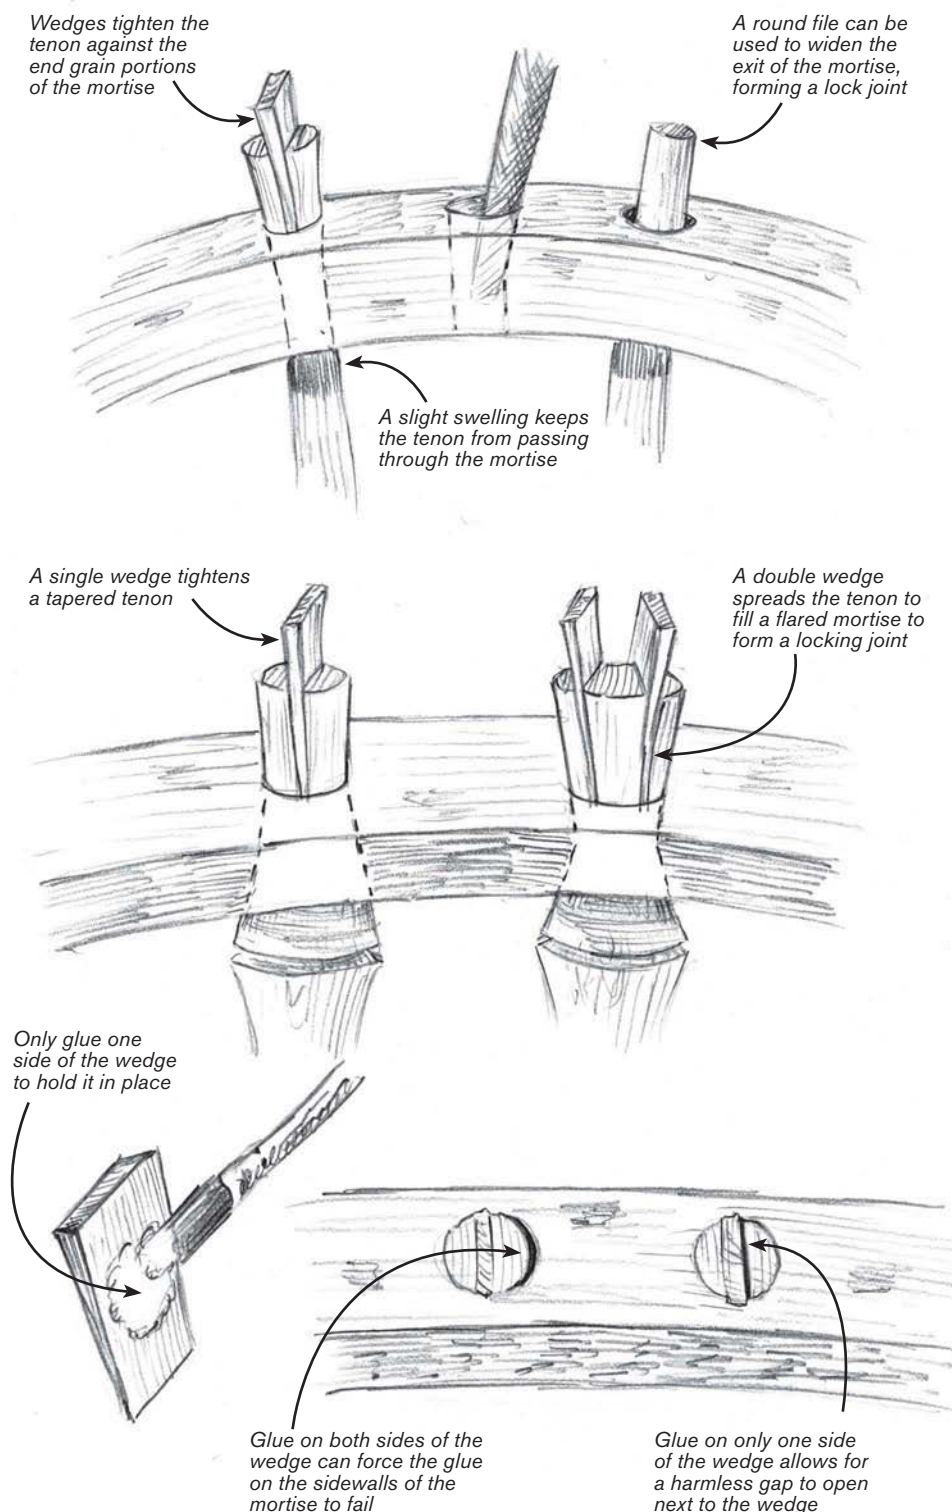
wedging makes for a tighter joint than you could hope to fit together
